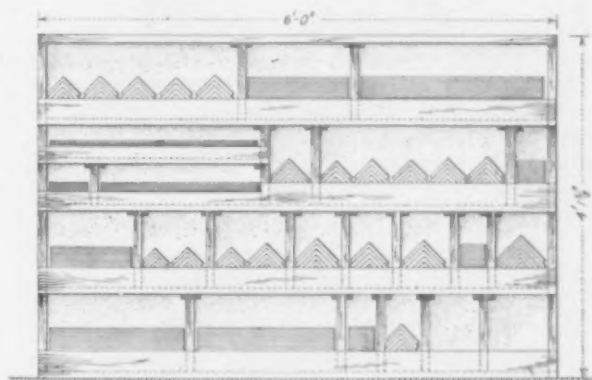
Movable Bins for Parts for Assembly of a Given Size Lot
